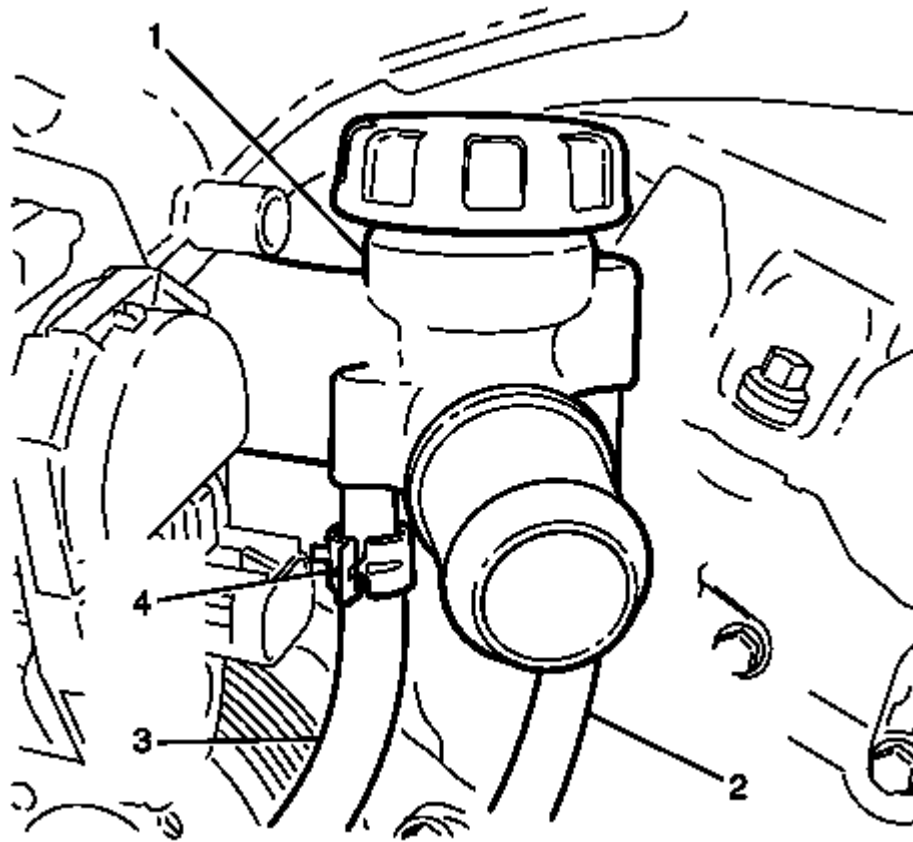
Identifying Heater Outlet Hose, Heater Outlet Pipe Quick Connect Fitting & Retaining Clip
